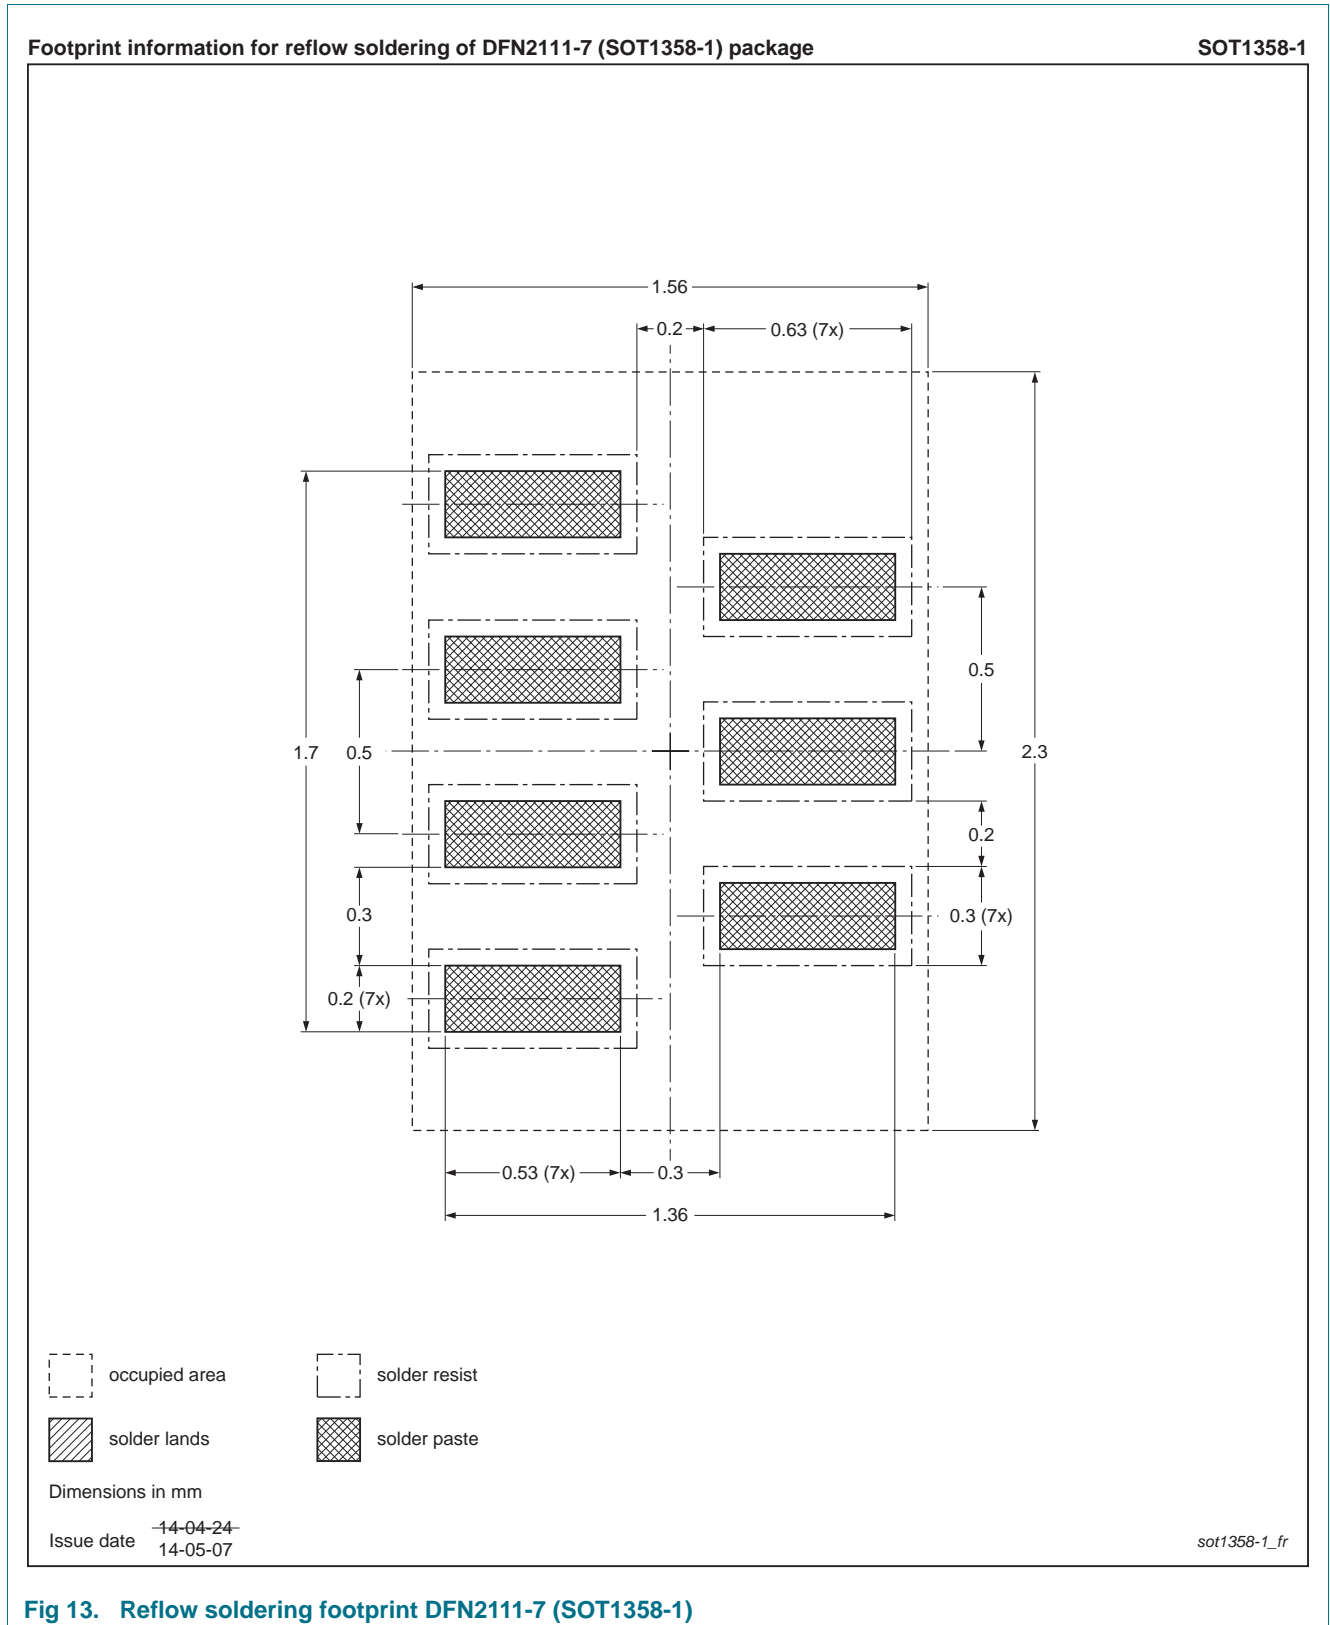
Reflow soldering footprint DFN2111-7 (SOT1358-1)
